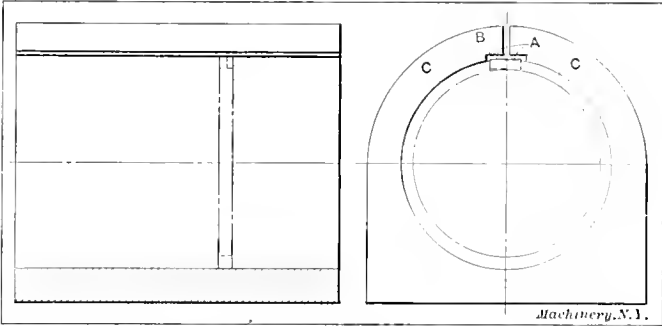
Fixture for Holding the Rings while they are being secured in the Grinding Arbor
